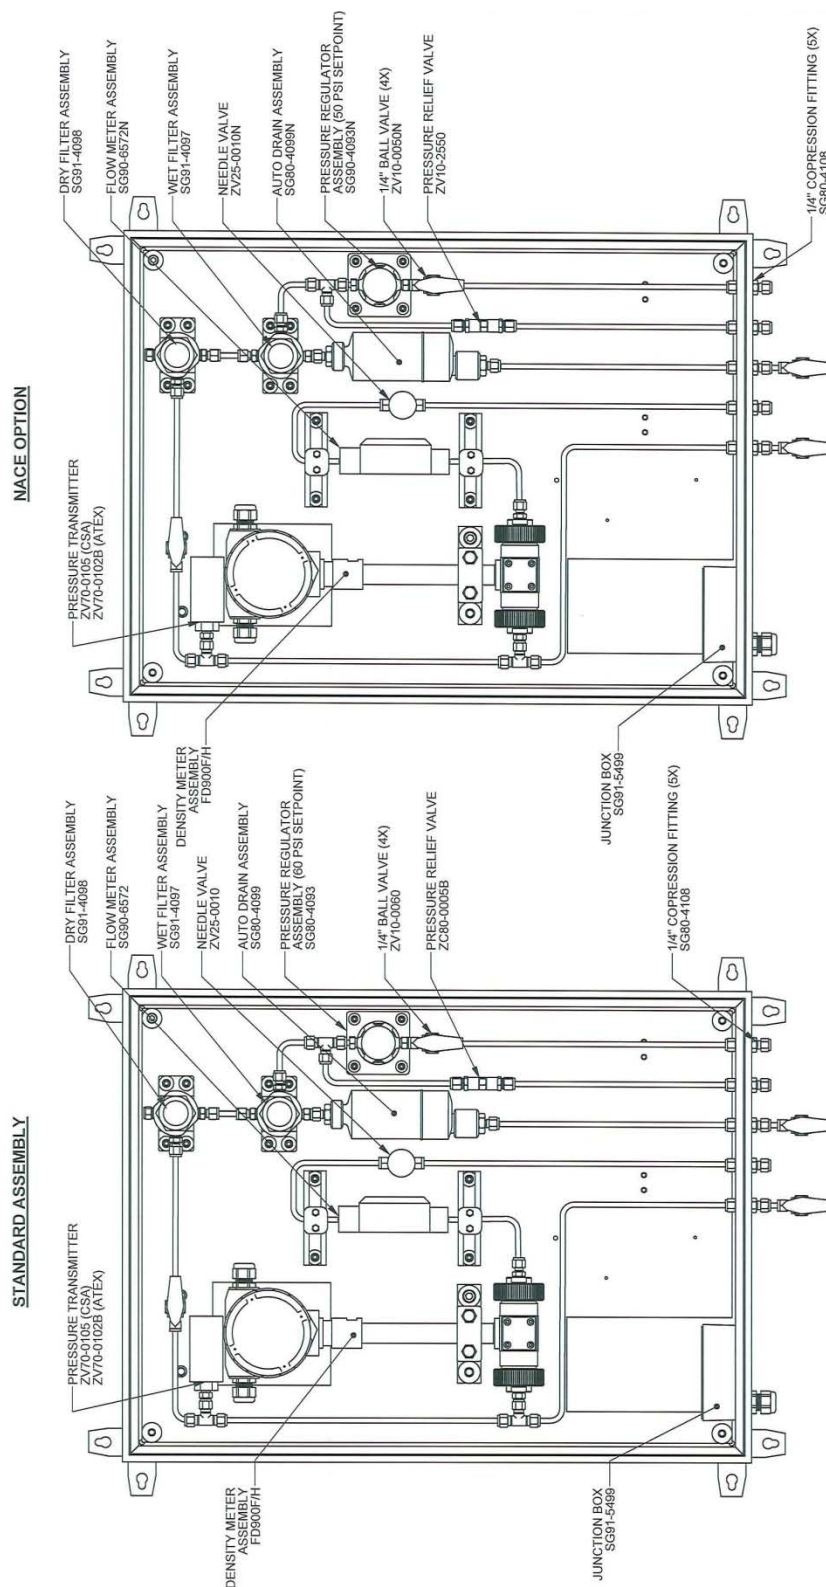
SG91-6000: General assembly drawing, wet gas system (sheet 1 of 3)
